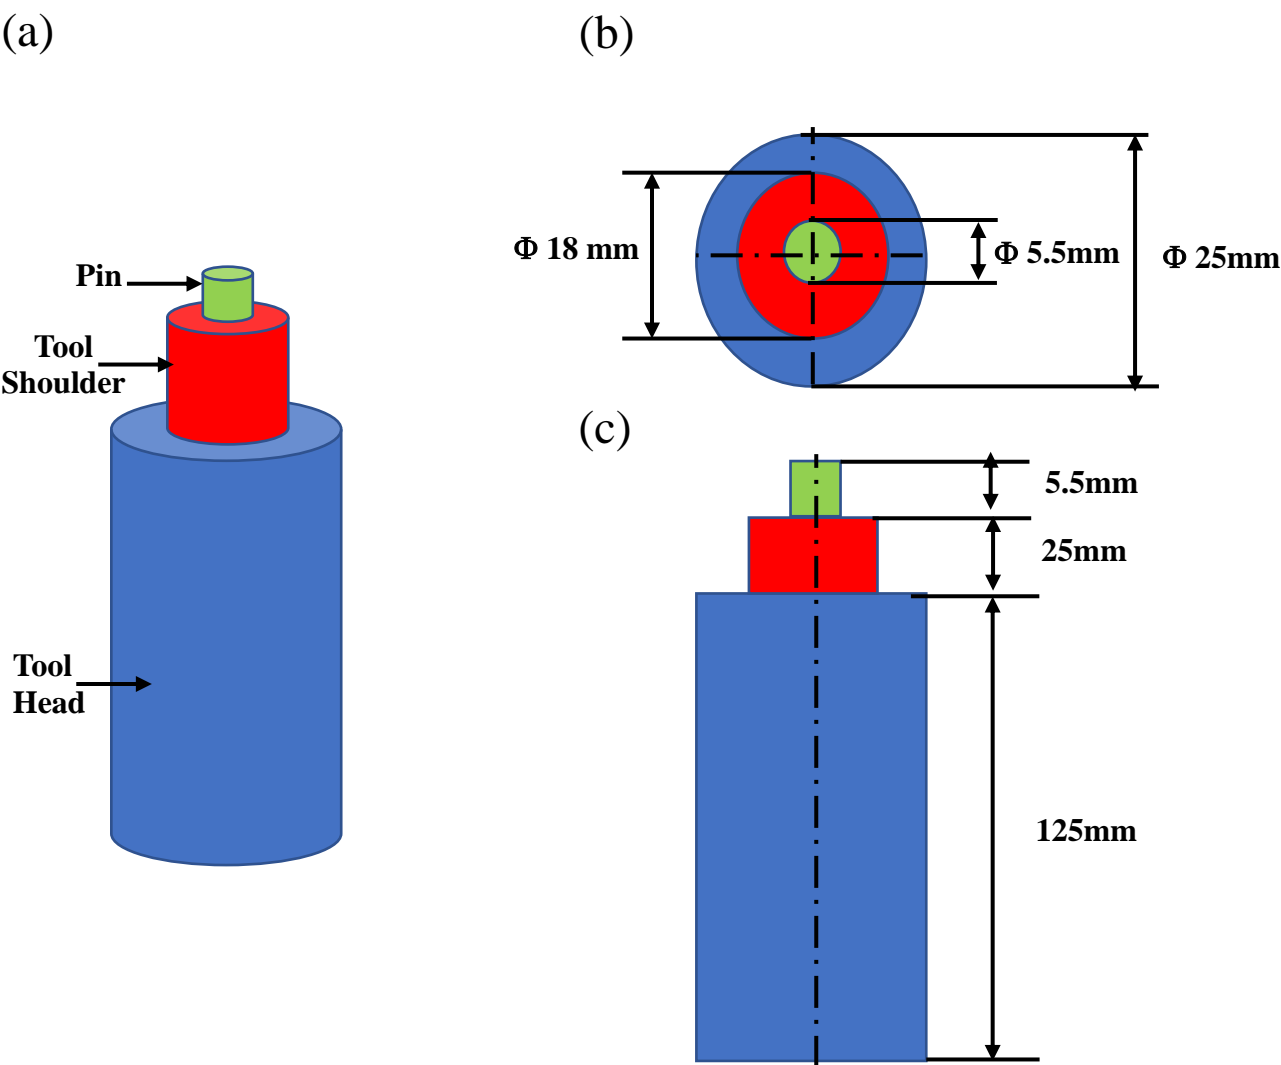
(a) Schematic representation of Overall view of Tool, (b) Top view of Tool, (c) Front view of Tool.
